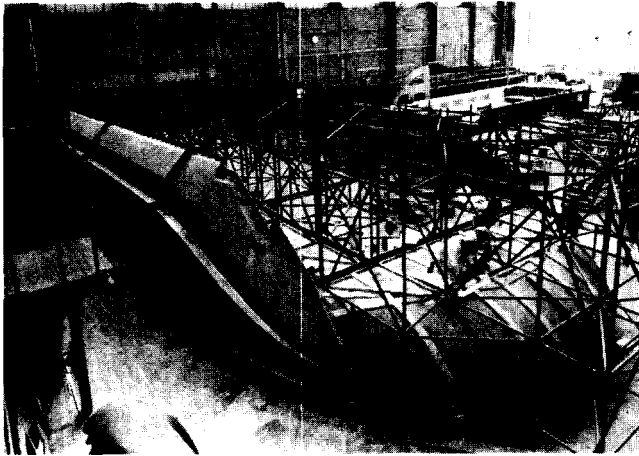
HM527 Series---Hull Mould Being Constructed over the Plug
